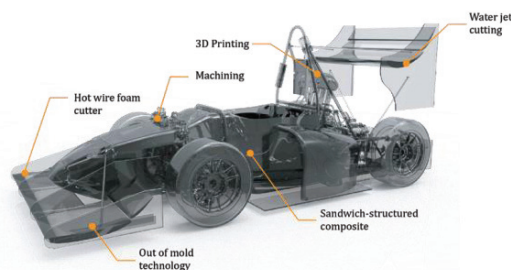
Used manufacturing processes for FSUPV-02 prototype fabrication
